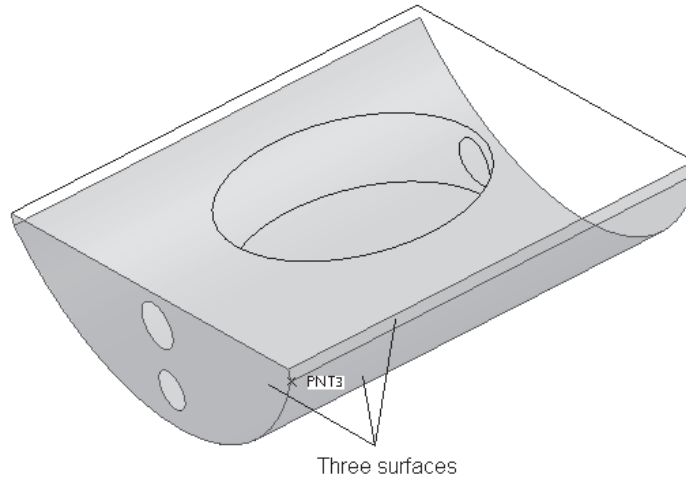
The three highlighted surfaces and the datum point at the intersection of the three surfaces
